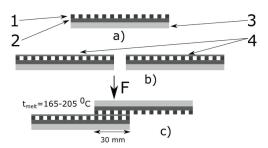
Schematic illustration of the soldering procedure of the two tapes (1-Copper stabilizer layer, 2-YBCO layer, 3-buffer/substrate, 4-thin solder layer).
